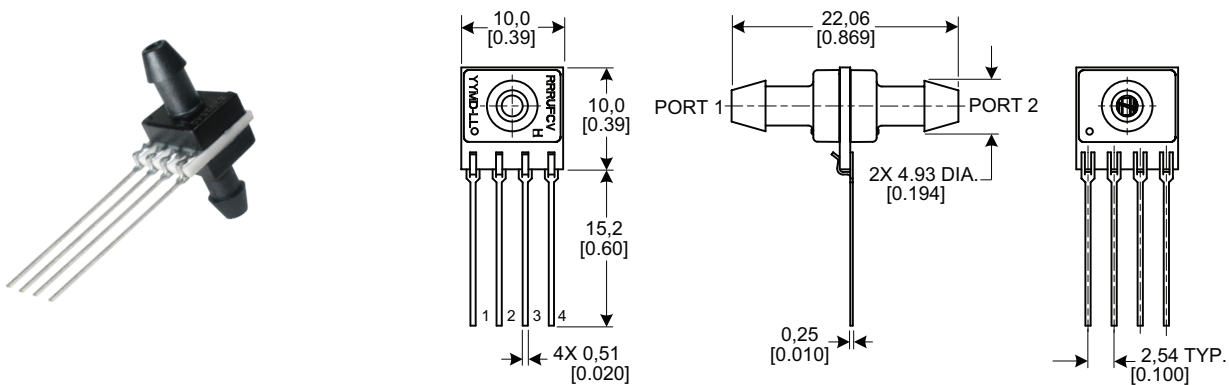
SIP Package Dimensional Drawings (For reference only: mm [in])
